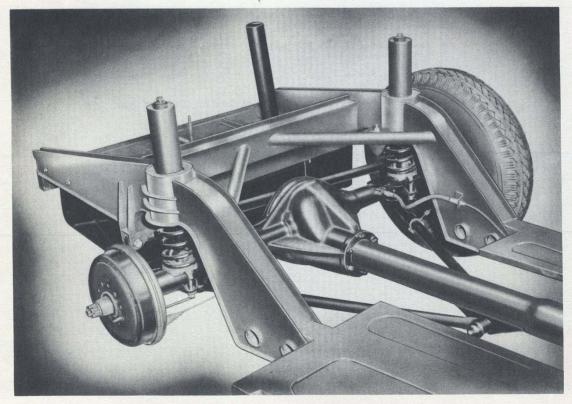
Rear Coil Spring and Shock Absorber Mounting.
